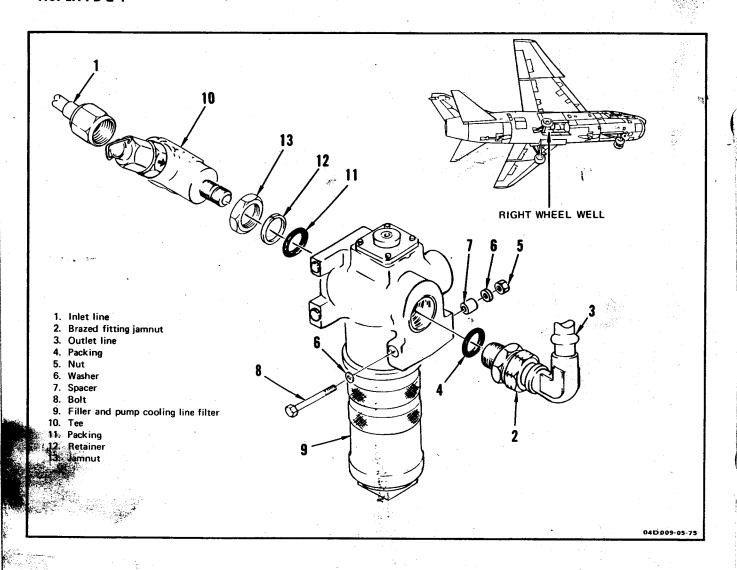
Filler and Pump Cooling Line Filter Removal and Installation
